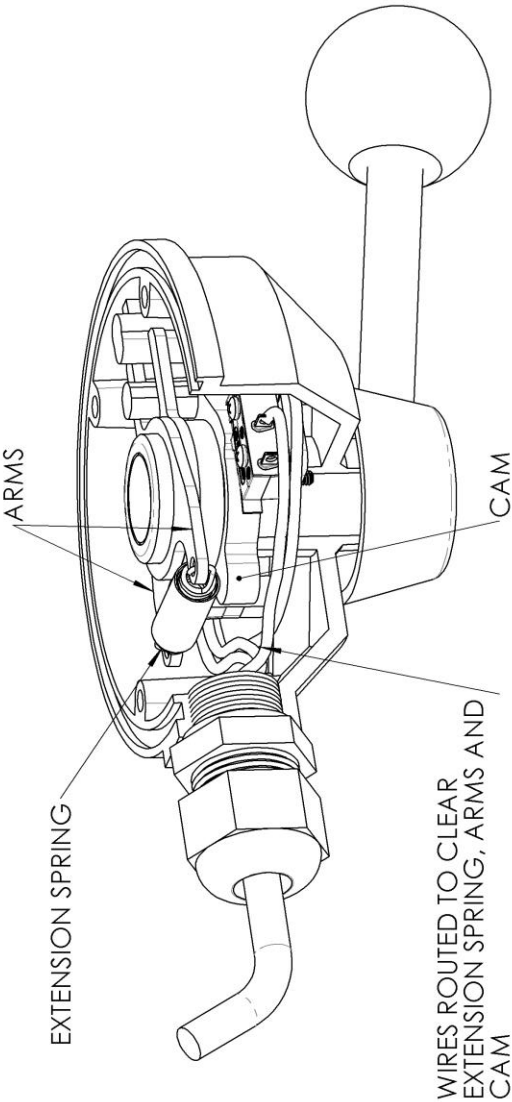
Wire routing showing particular parts to ensure adequate clearance, 7170-A1 shown.
